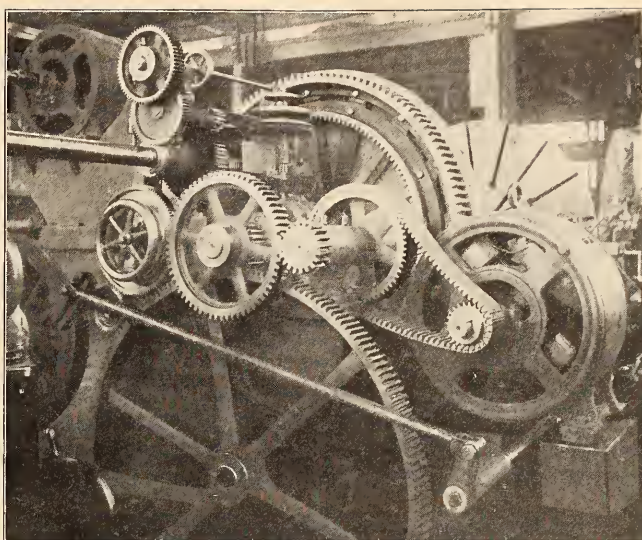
SHOWING MOTOR CONNECTION TO 79-IN. WHEEL LATHE—TERMINAL R. R. OF ST. L.
